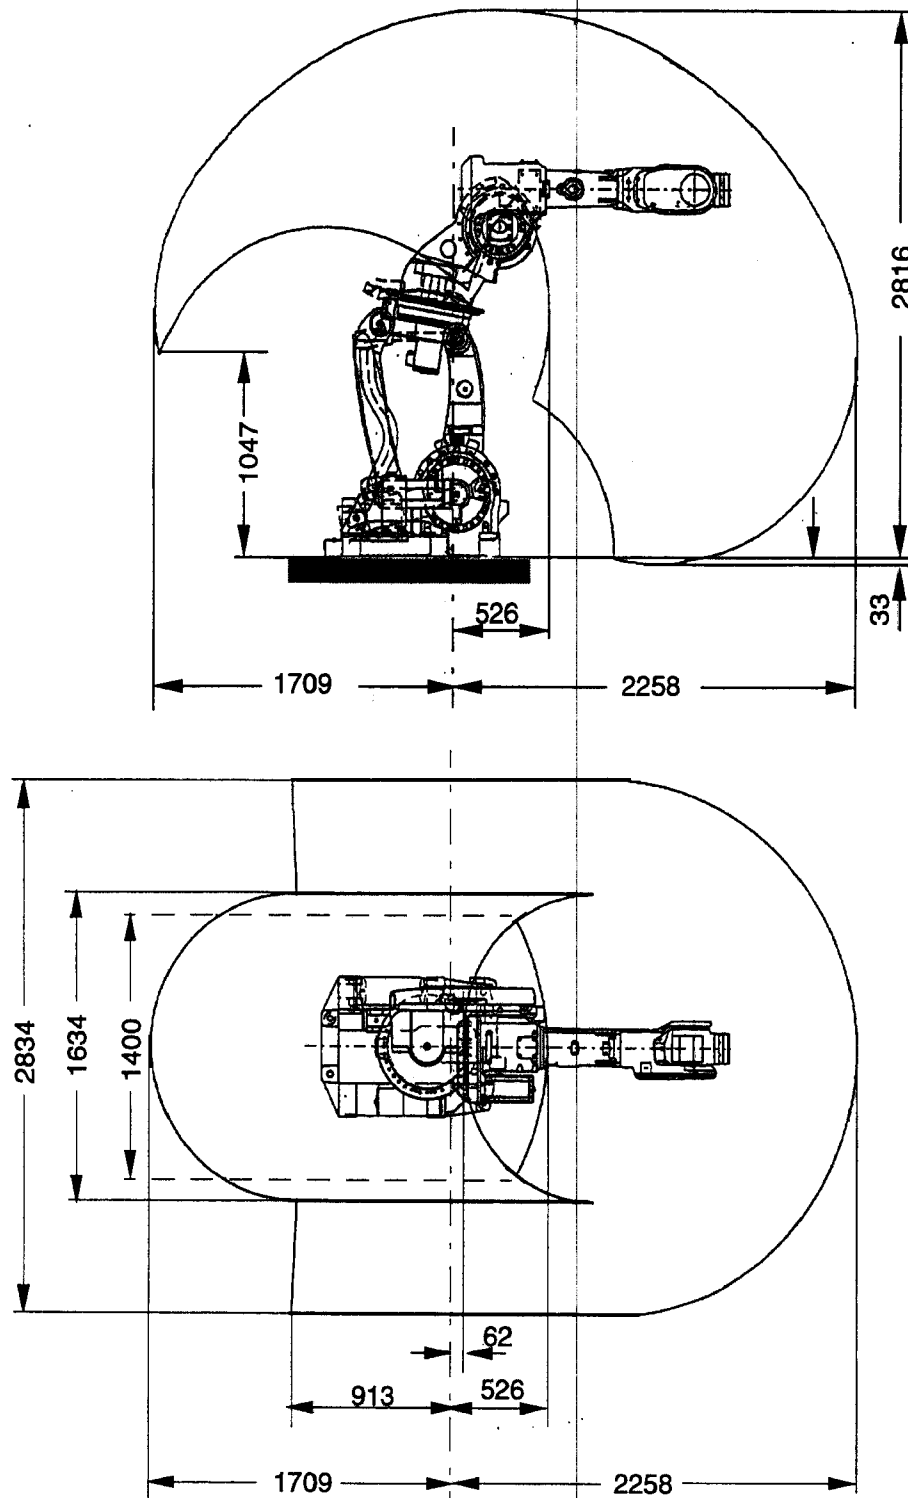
The extreme position of the robot arm IRB 6400C Bend-Back (dimensions in mm).
